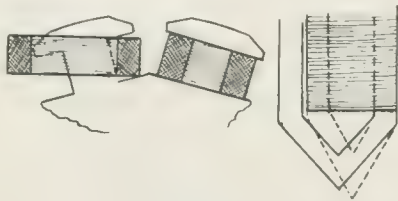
SKETCH SHOWING METHOD OF PUTTING MACHINE WOUND COILS ON THE POLES
